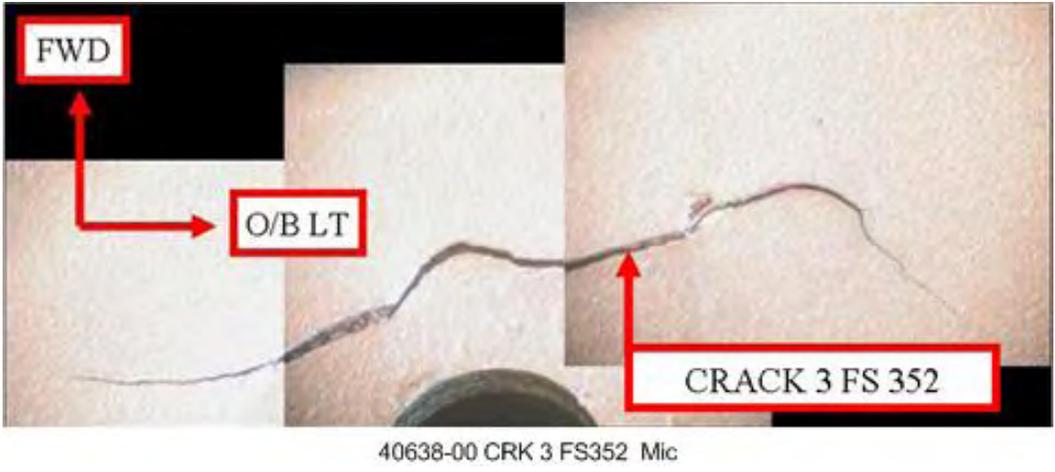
Microscopic View of Crack 3 on the Fuselage Bulkhead Assembly FS 352
